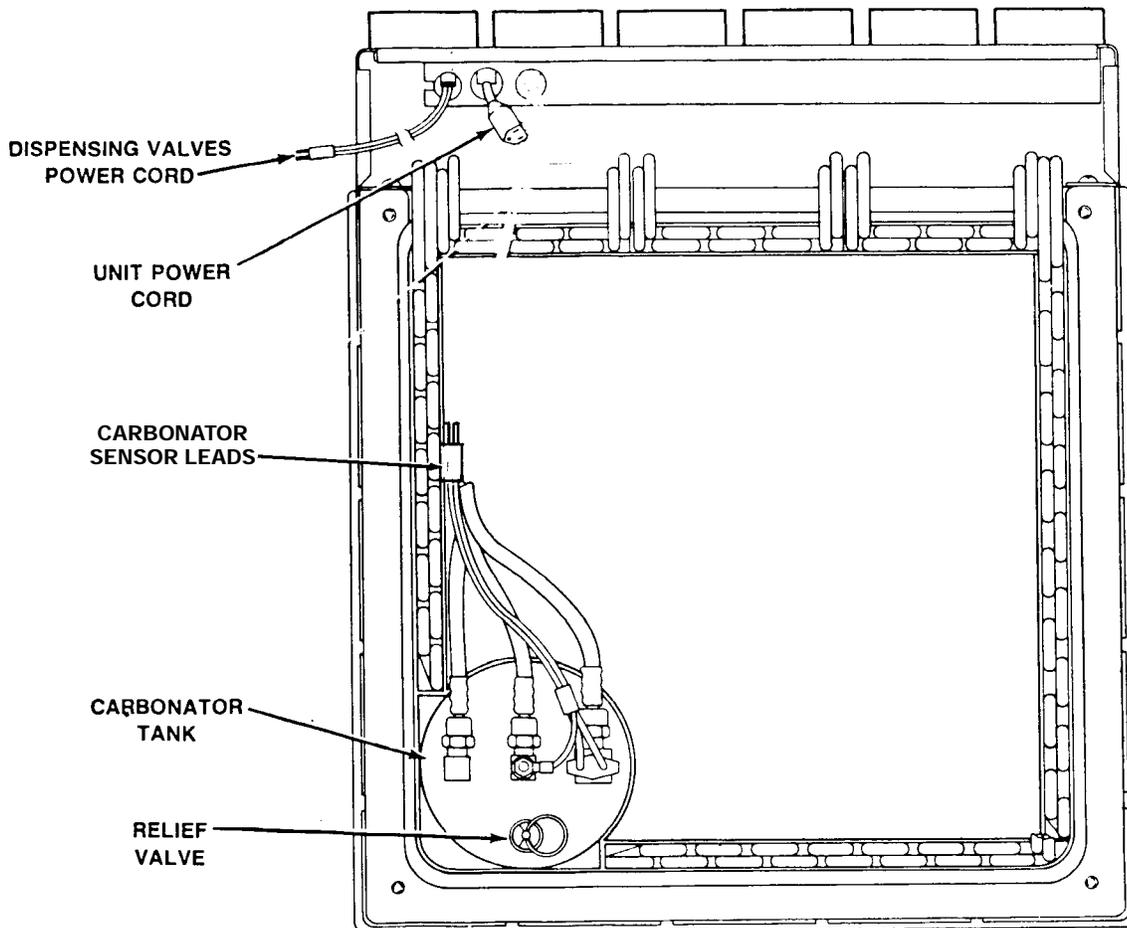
WATER TANK (UNIT WITH BUILT-IN COLD CARBONATOR SHOWN)
